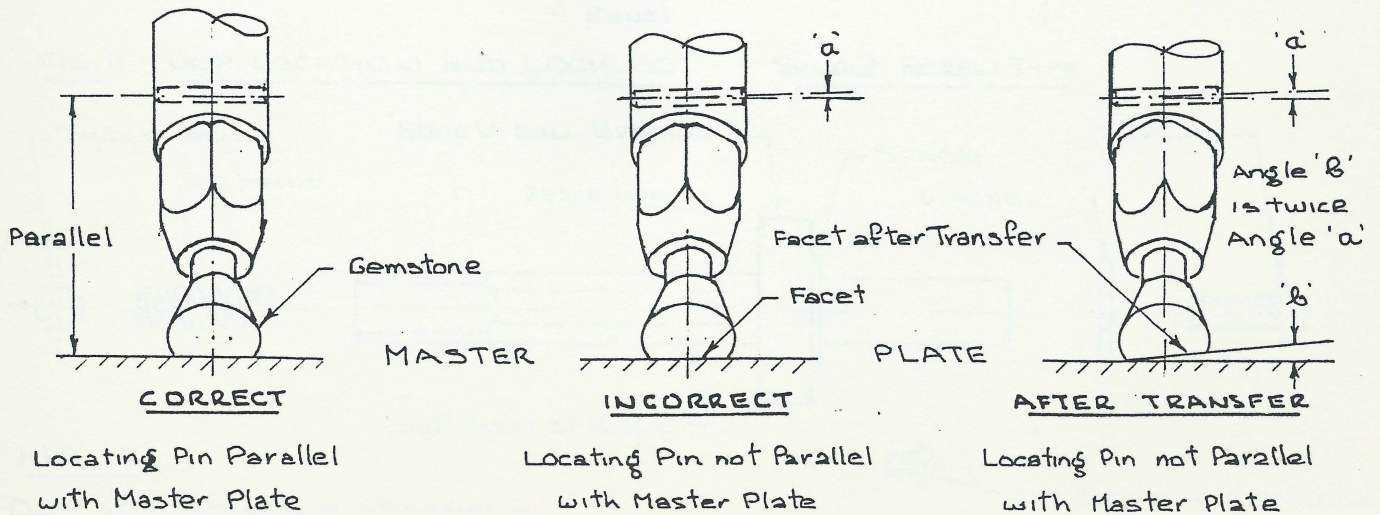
SETTING DOP ARM LOCATING PIN PARALLEL WITH MASTER PLATE
